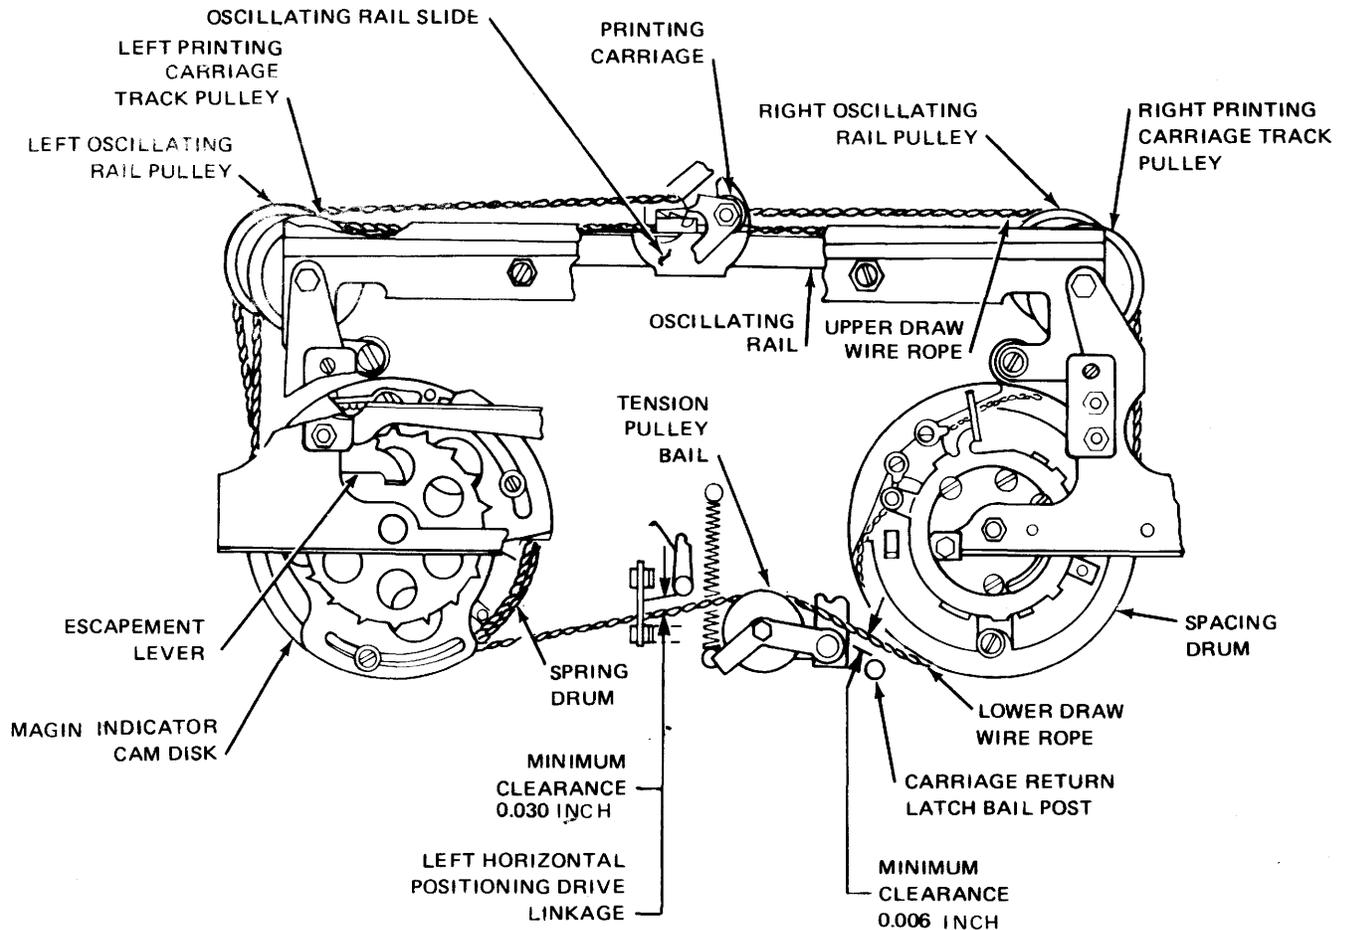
Lower Draw Wire Rope Adjustment (Front View).
